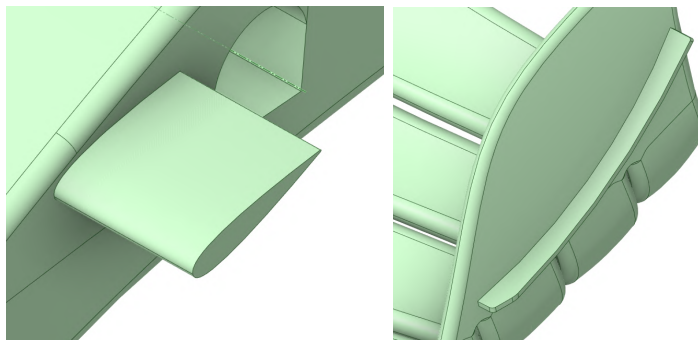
Winglets group is composed of the two larger winglets behind the front wing (Top) and two smaller winglets connected to the endplates (Bottom).
